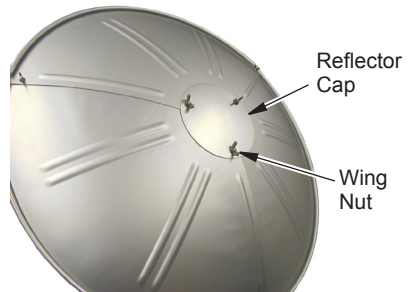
Attaching Reflector and Reflector Cap to Burner Assembly
